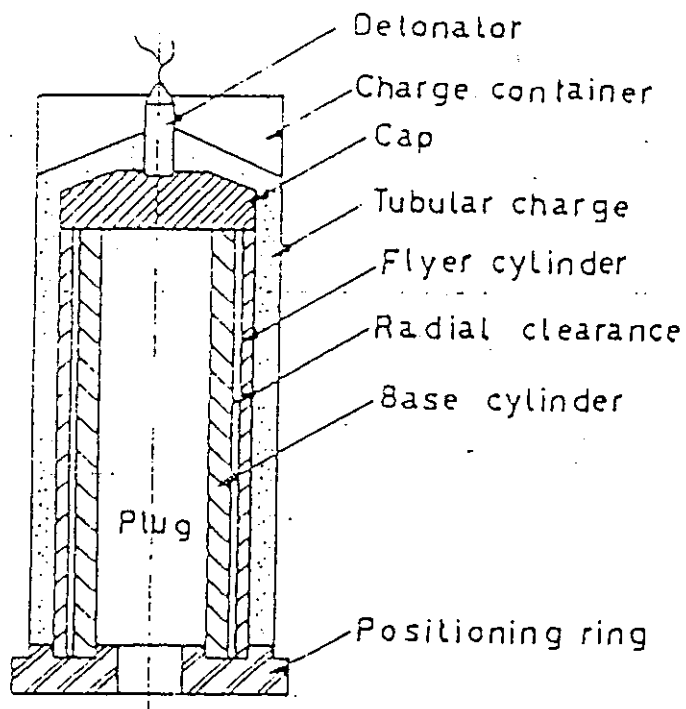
Implosive welding system after Ref.[1]
